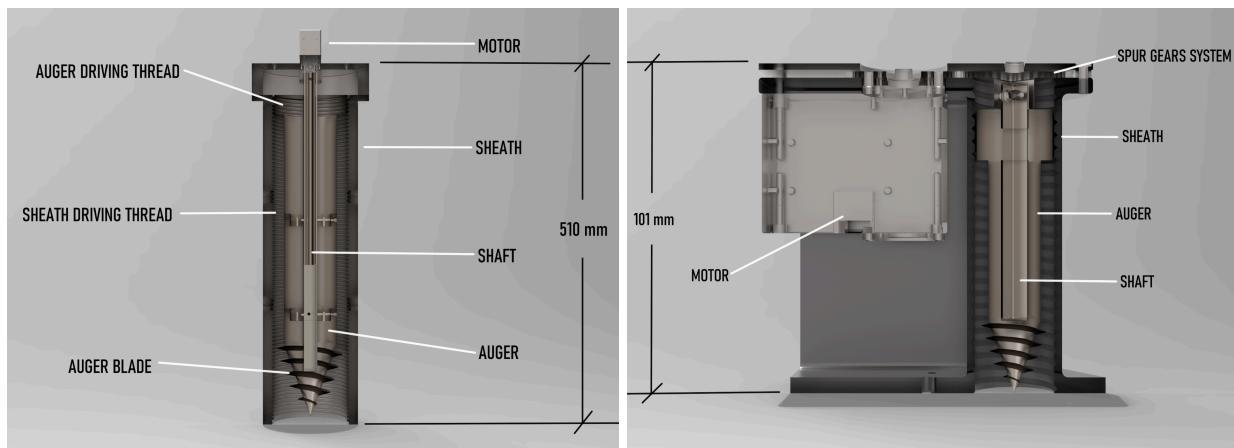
Anchor Cross Section: Full scale design (left), 1/5 Scale Earth analog prototype (right)
